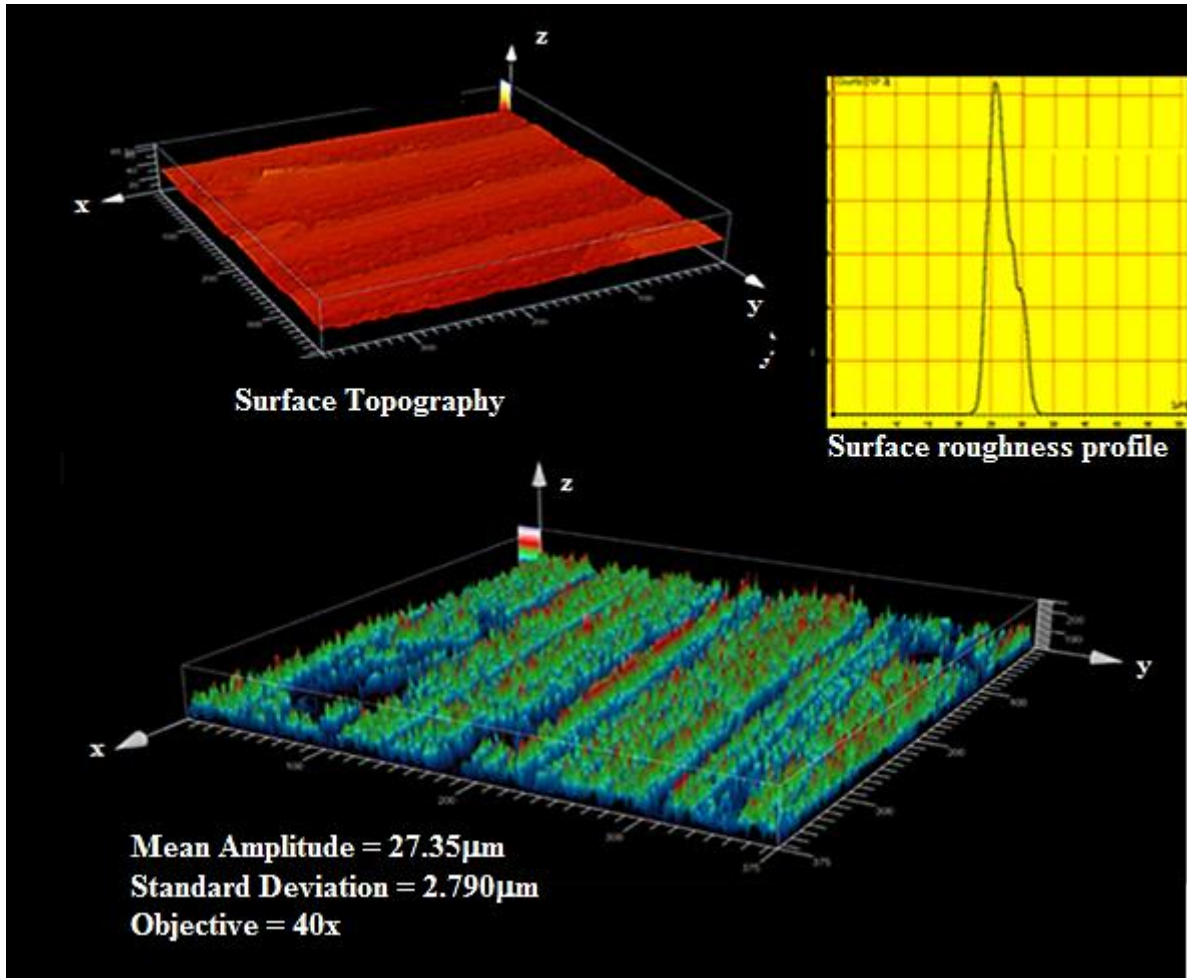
Laser confocal 3D topographical maps and surface deviation profile for the Ti-6Al-4V sample machined with the 7Ni-S insert under dry milling condition at 75m/minute using 7Ni-S cutting tool insert
